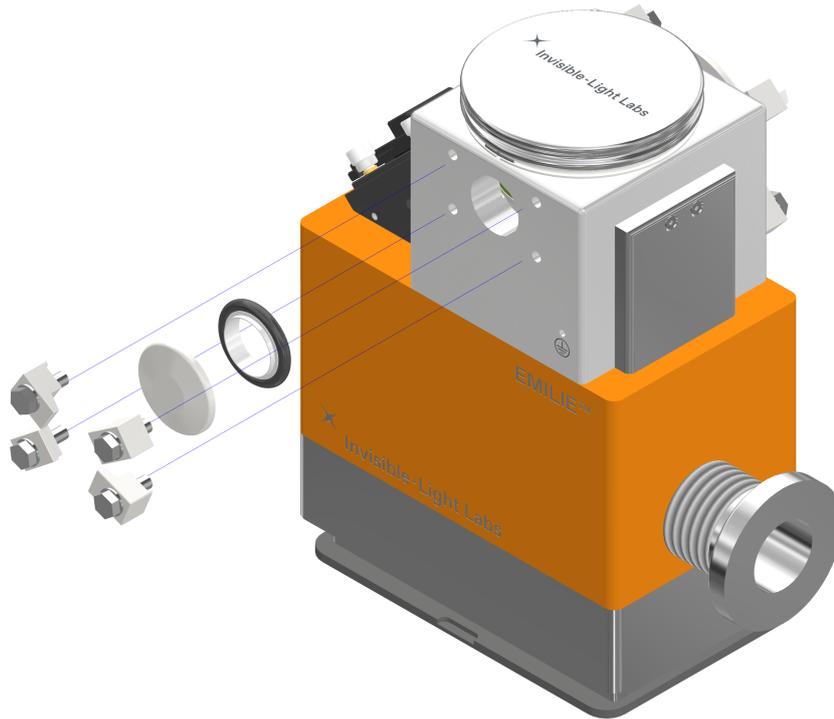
Removal of the KF25 blind flange covering the vacuum opening of EMILIE™.
